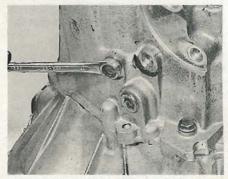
Six of the gearbox casing-to-bellhousing bolts (arrowed) – external selector lever assembly removed (Sec 7)
